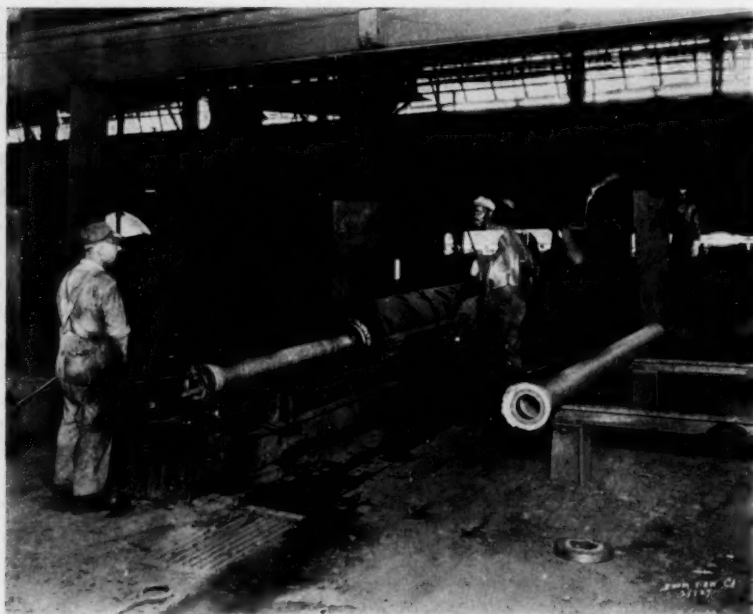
WITHDRAWING PIPE FROM CENTRIFUGAL MOULD
